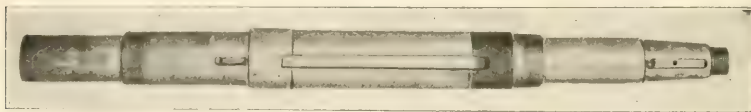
ARMATURE SHAFT TURNED, THREADED AND KEYSEATED
